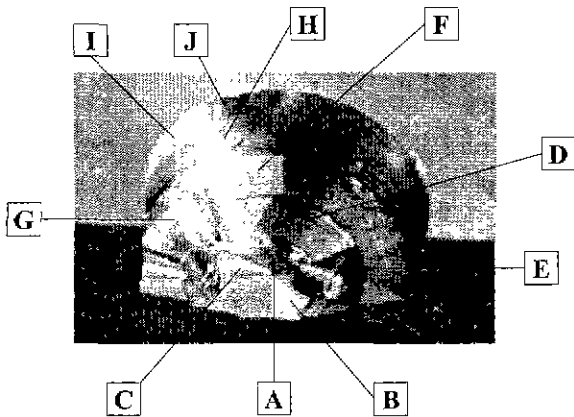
Photograph on the lead end of BTA drilled workpiece (SM45C VS. P20)
